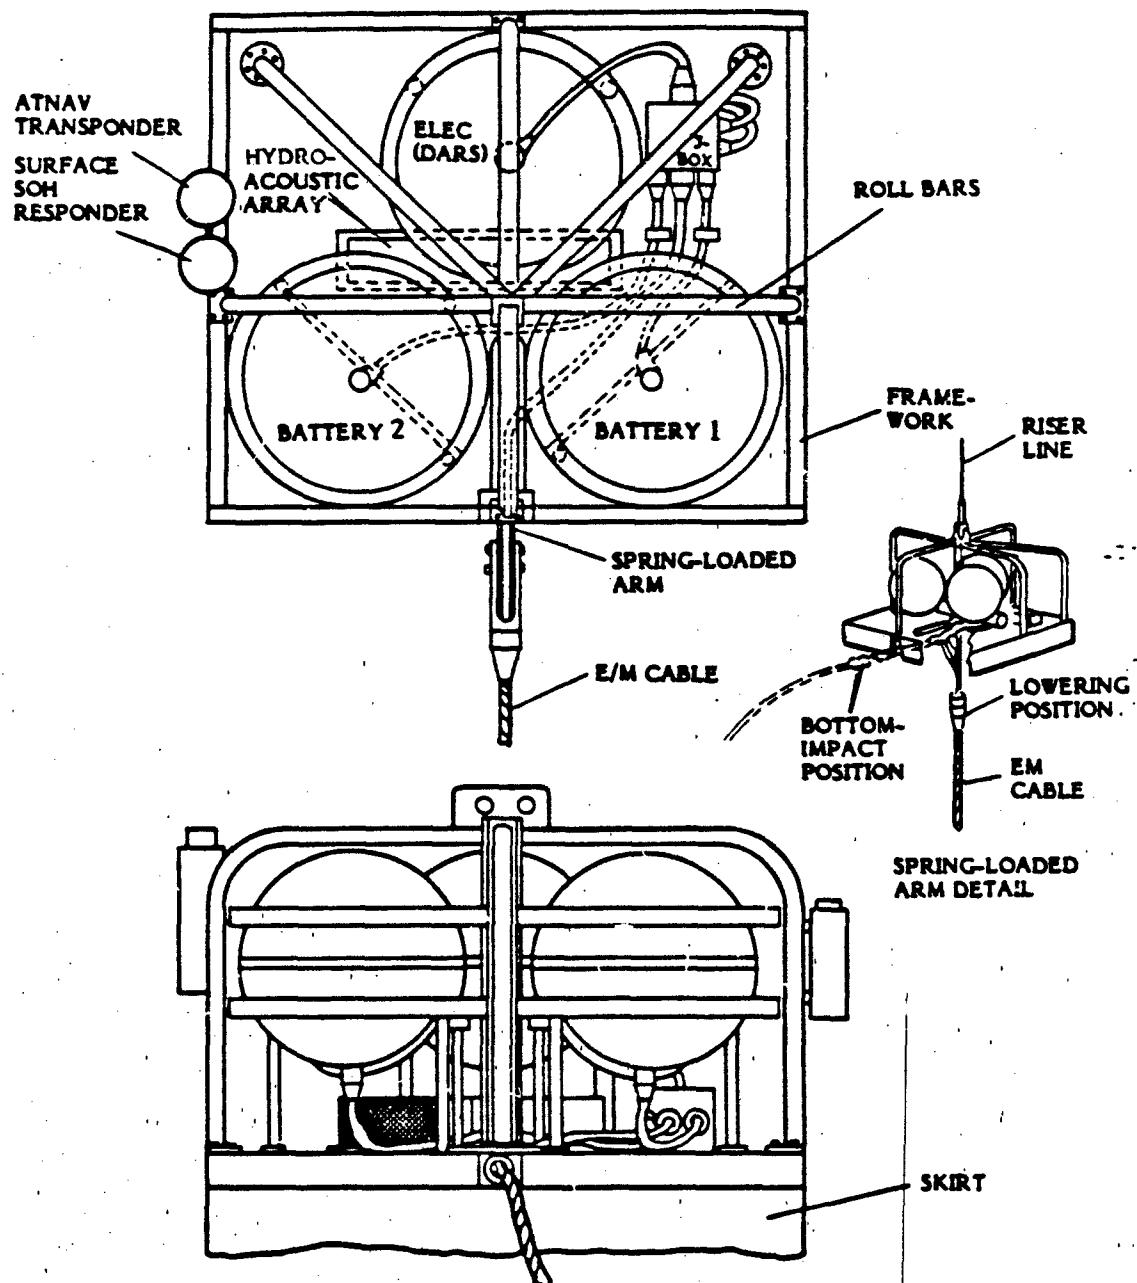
MSS - Bottom Processing Package - Mechanical Configuration
